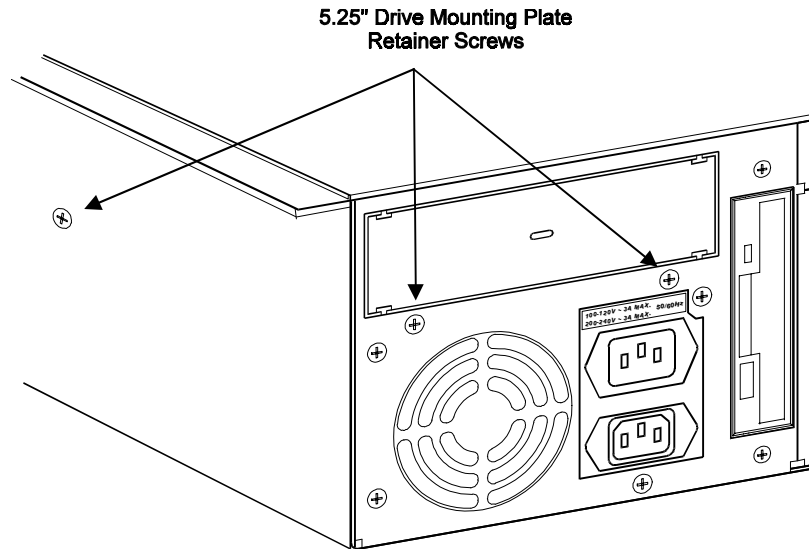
6. 5.25" Drive Mounting Plate Retainer Screw Locations
